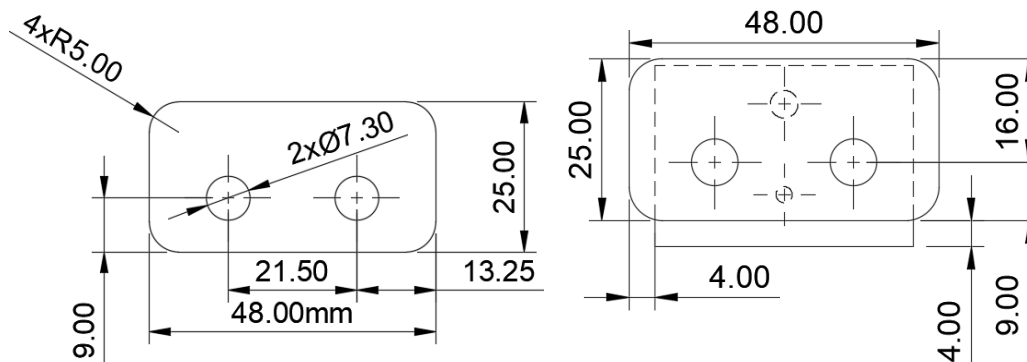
Label drawing (left) and relative placement of label and box (right) (mm)
